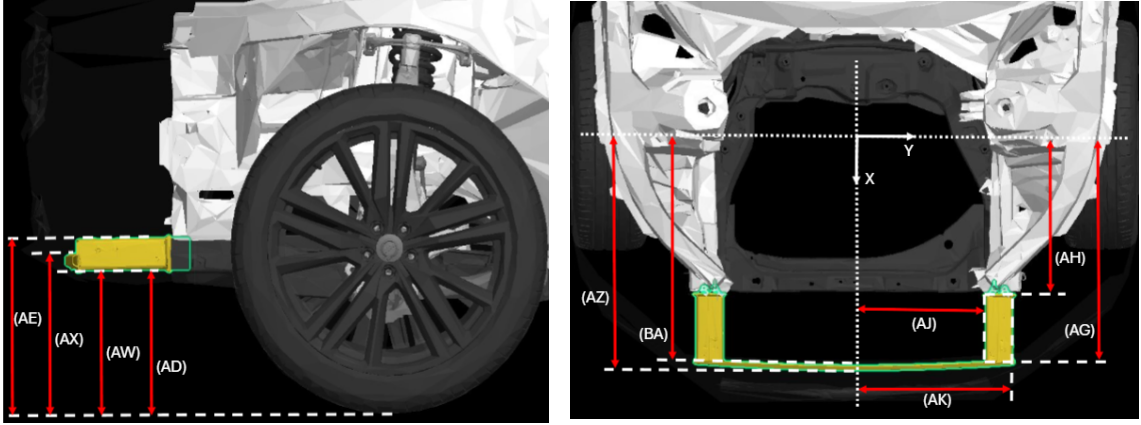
Measurements for Subframe Extension & Lower Crossbeam - Side & Top views [25]
